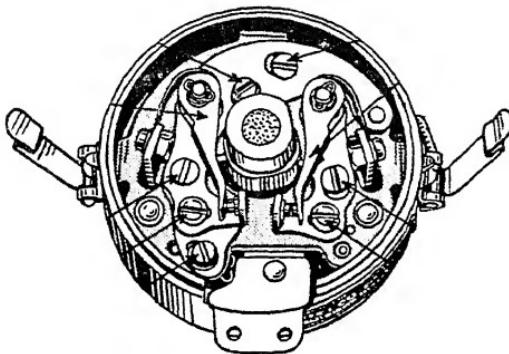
VIEW OF DOUBLE BREAKER LEVERS
